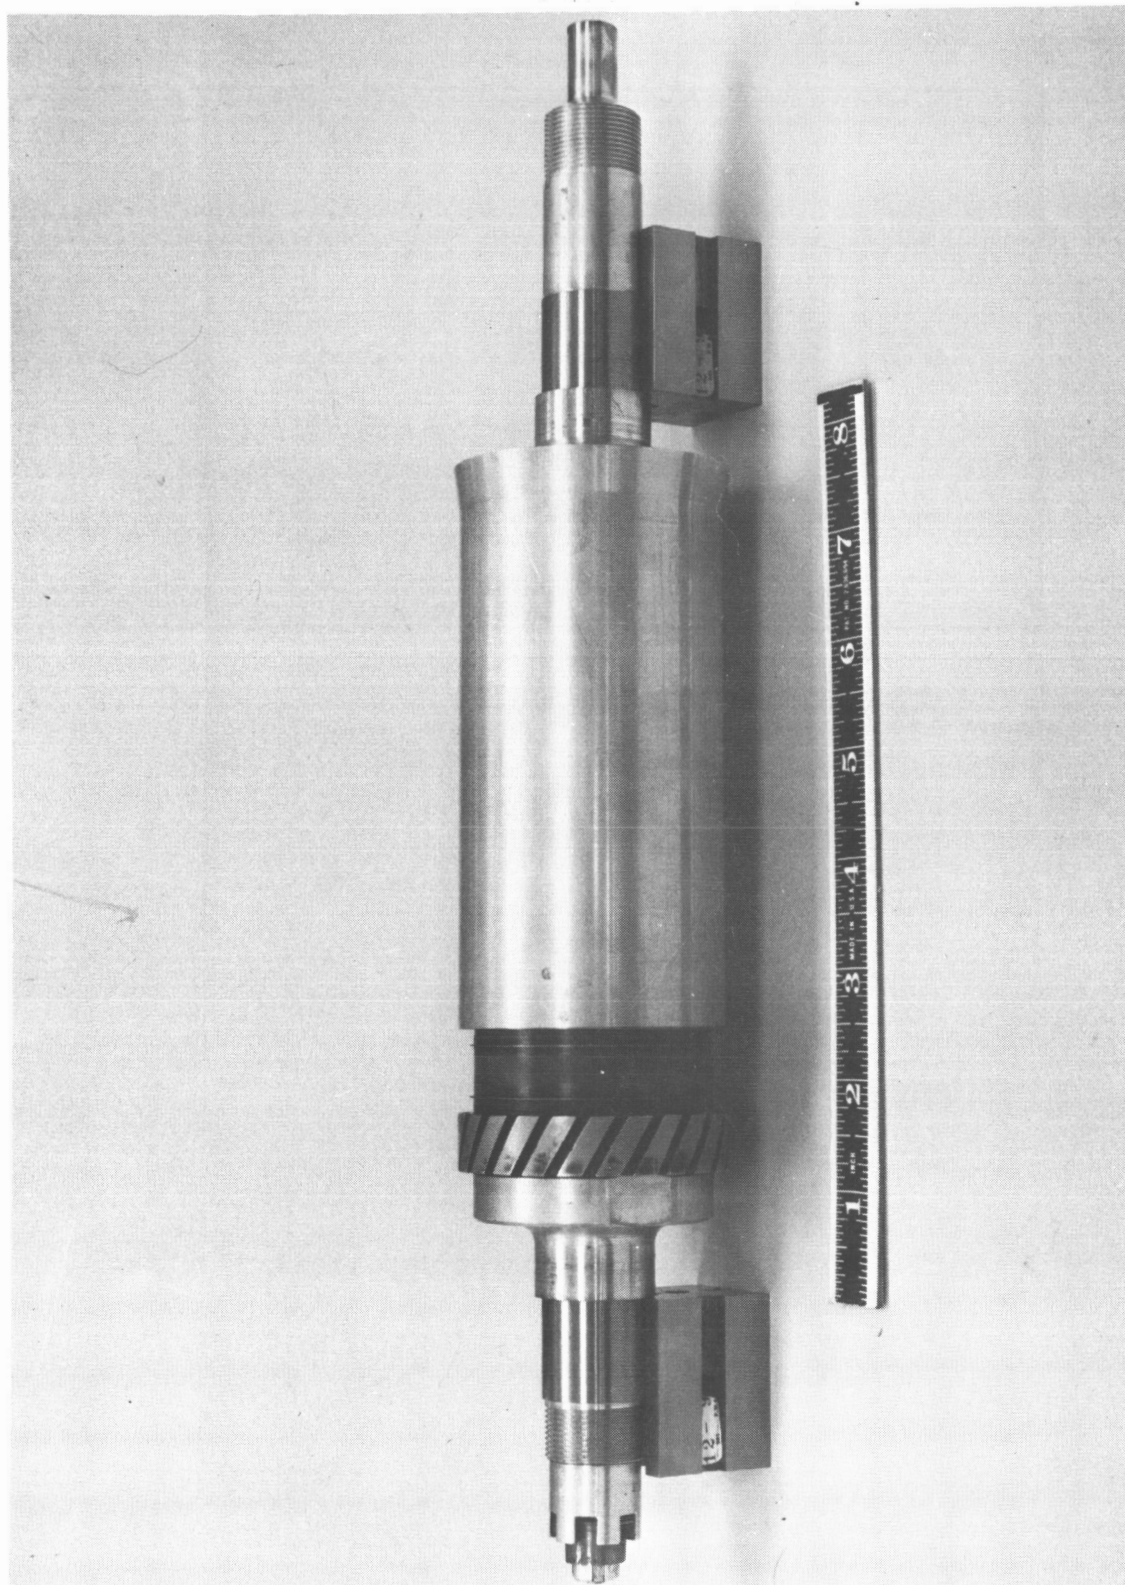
Alternate Rotor for Testing First-Stage Blades and Stator X-22165
